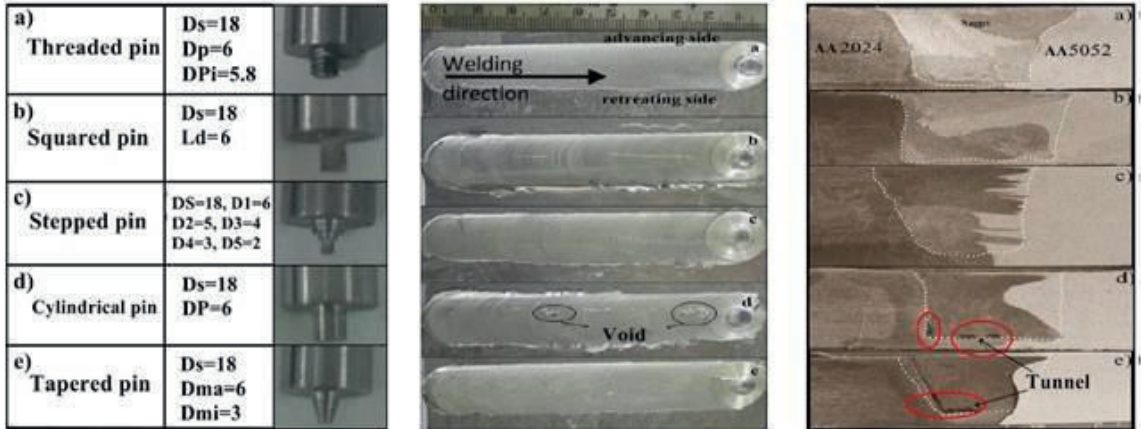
Tool pin profile and its dimensions. Fig. 2. Surface morphology of the welded samples of the corresponding tool profiles (a, b, c, d, e) Fig. 3. Macrostructures taken from corresponding welded samples.
